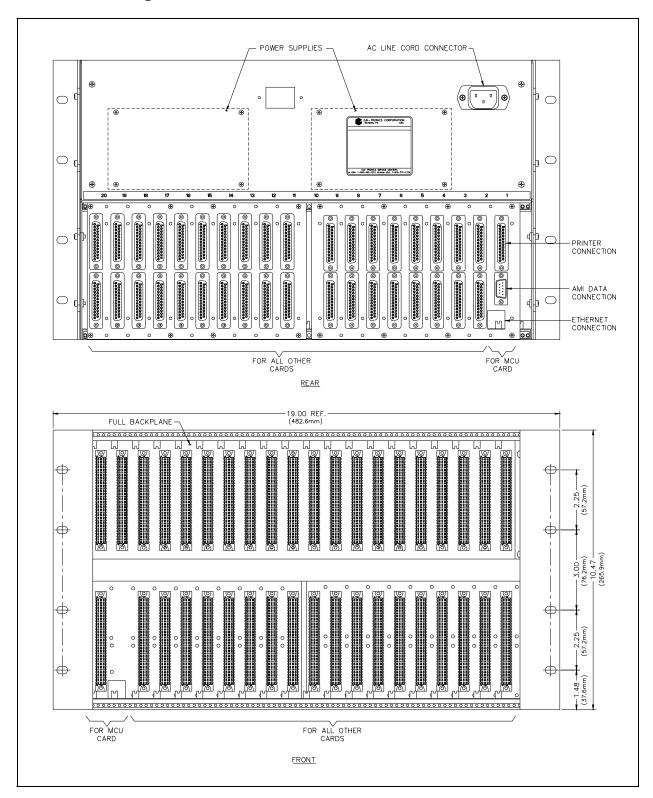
10457-040 Full Backplane Card Rack Assembly
